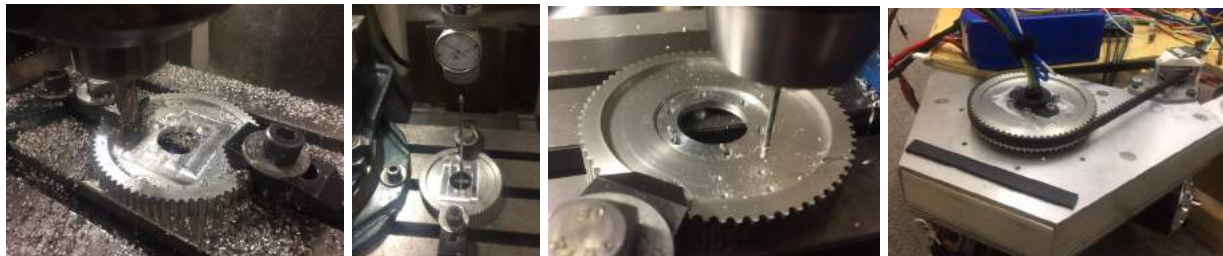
Remove Hub (Left), Locate (Left Center), Pattern (Right Center), Assembly (Right).
